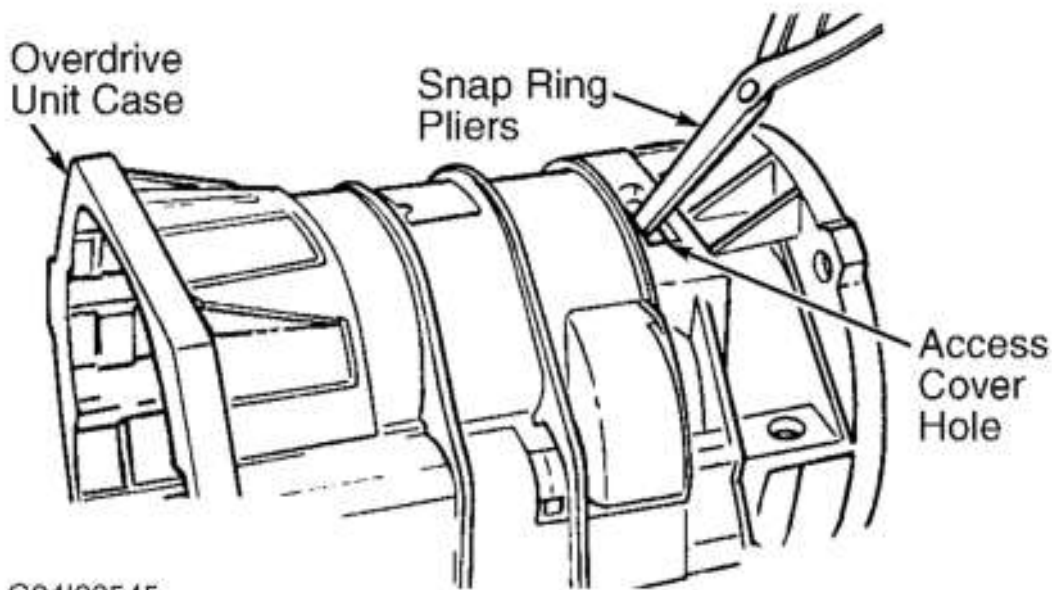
Releasing & Installing Bearing From Retaining Ring
